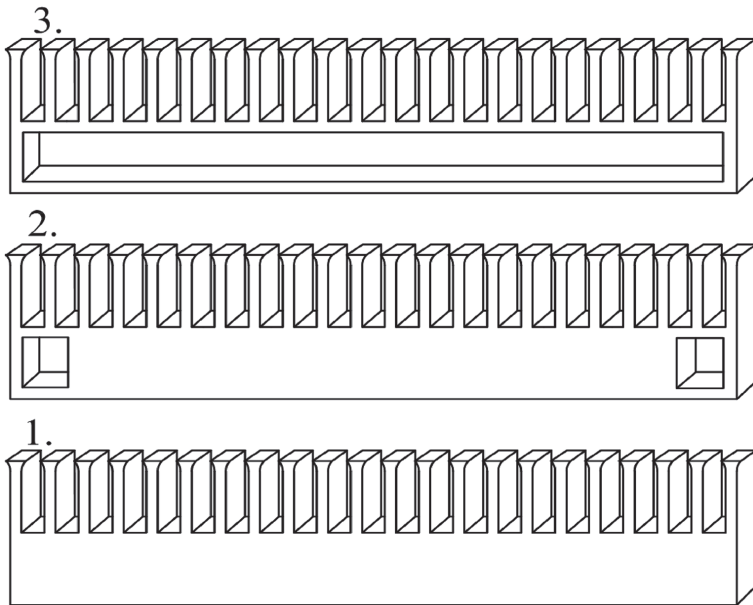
LIM cooling system with liquid heat exchanger constructed by the use of various steel sheets: 1 – core sheet, 2 – sheets with channels collector, 3 – steel sheets with cooling channel
